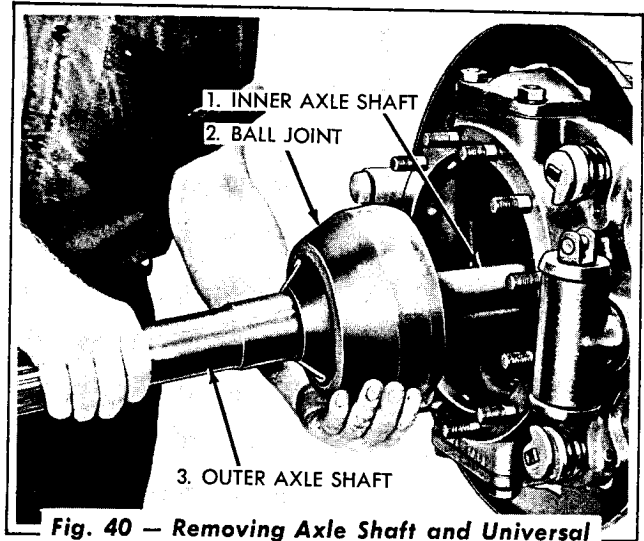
Removing Axle Shaft and Universal Joint Assembly
